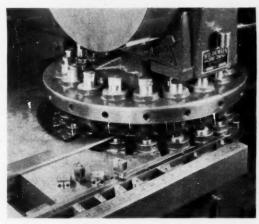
Closeup view of rack type gage used on Model R41-P Wiedemann Turret Punch Press. Workpieces are accurately positioned for cross dimensioning by means of the disappearing pin stops shown. The stop pins are located from the direct reading scale and are positive with no slipping or moving possible. The back gage and direct reading dial are used to position the gage bar for in-and-out dimensioning.
